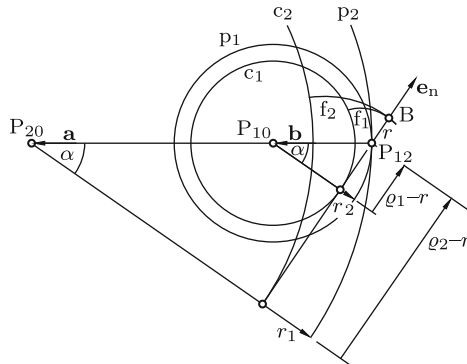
Wheel 2 with internal gearing meshing with wheel 1 with external gearing
